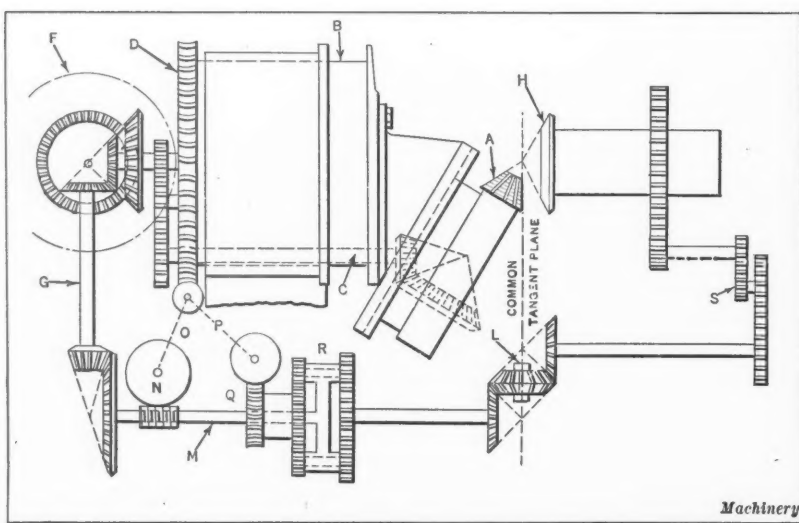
Diagram illustrating Arrangement of Gear Trains on a Spiral Bevel Gear Hobbing Machine
